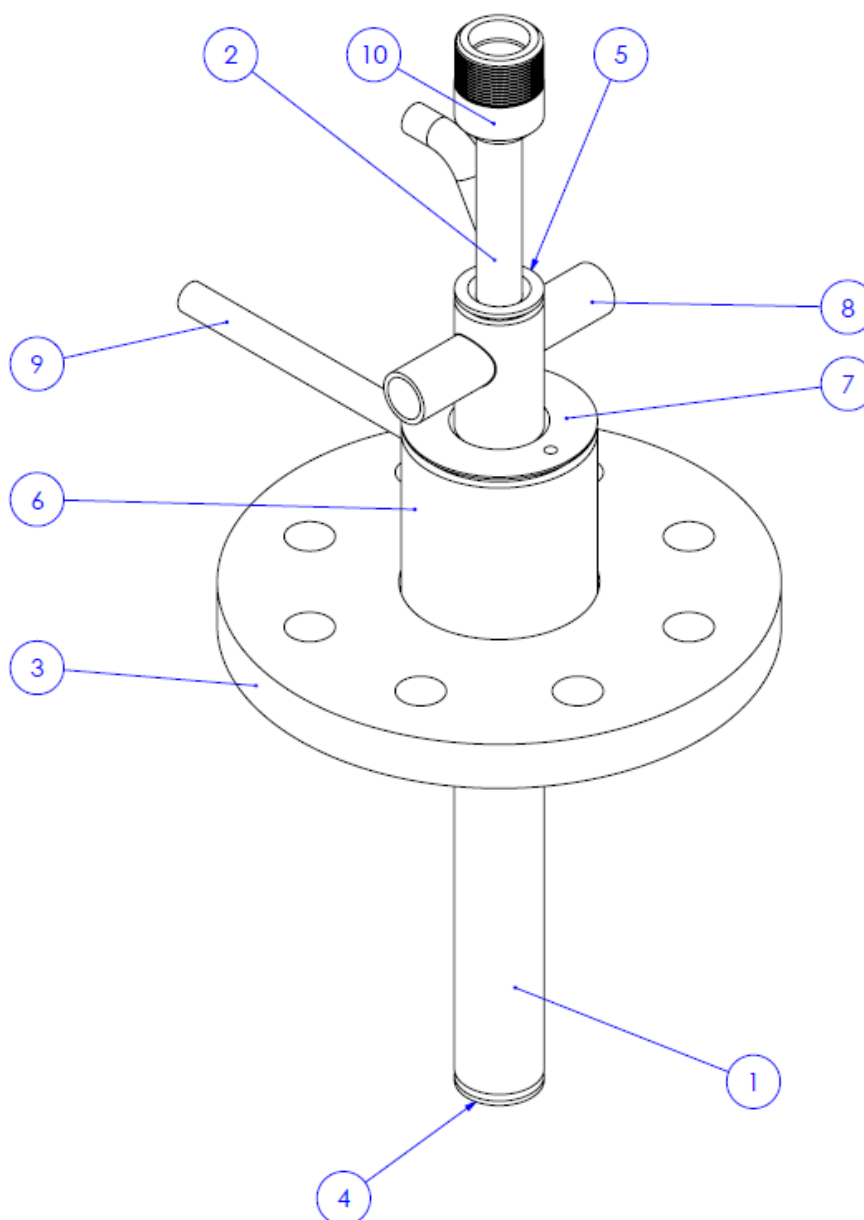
Feeder tube arrangement, with legend table below, Table 3-13.
